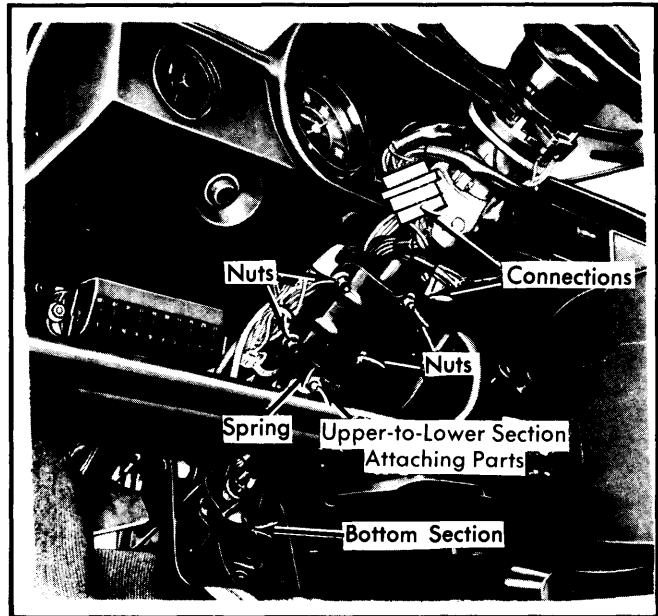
Installed View of Typical Steering Column as Viewed from Under Instrument Panel (Exc. Spider 2000)
